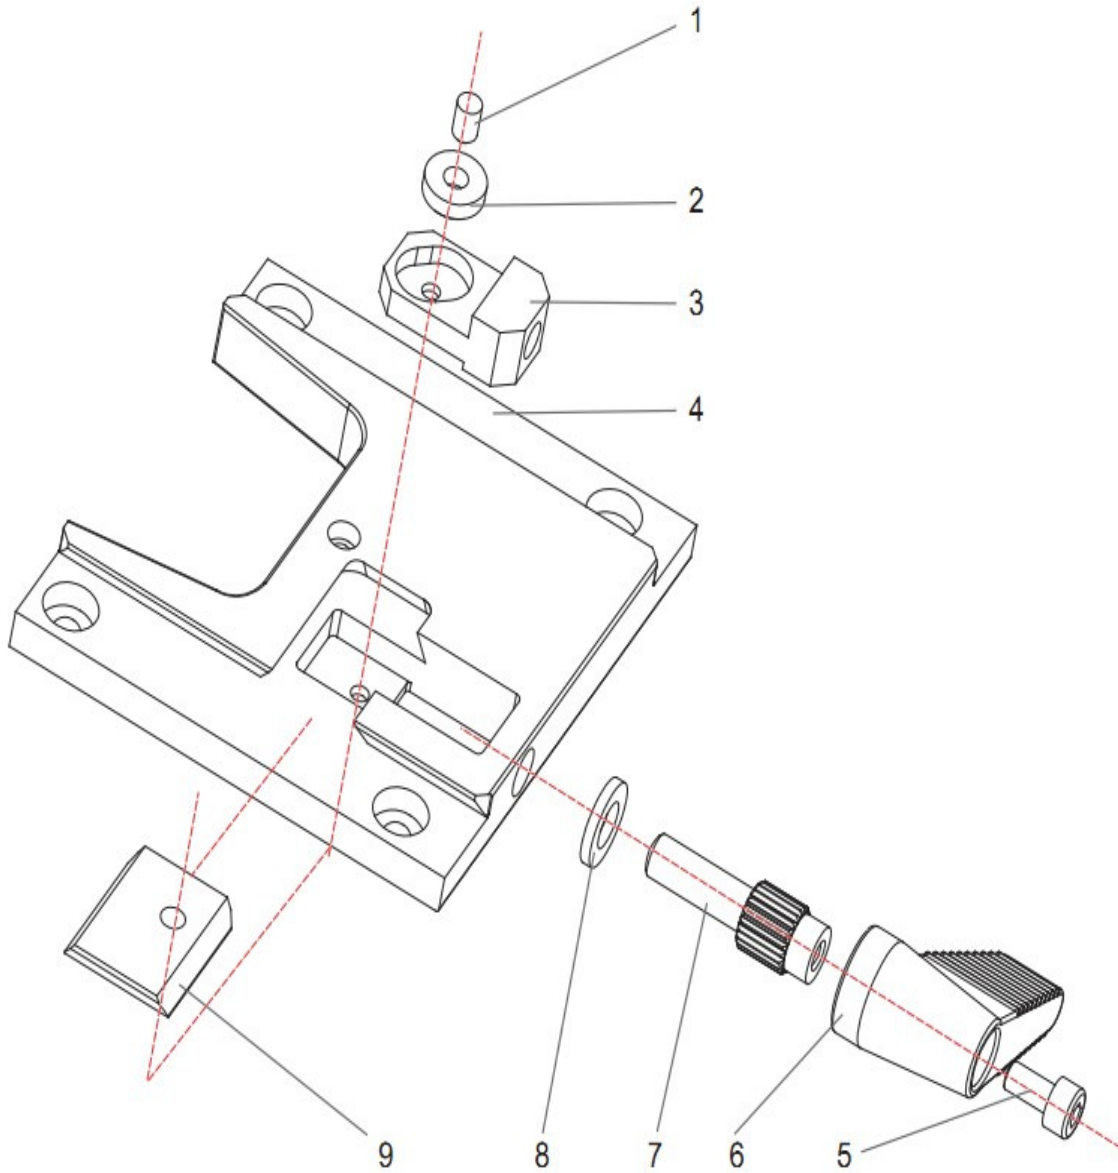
REACH PLUS 5 Fluid Head —Slide Plate Lock Assembly
